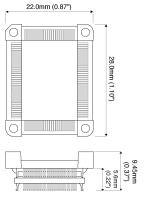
128 pin QFP Socket Adapter Dimensions for HP E3471C (HP P/N E3471-61621)
